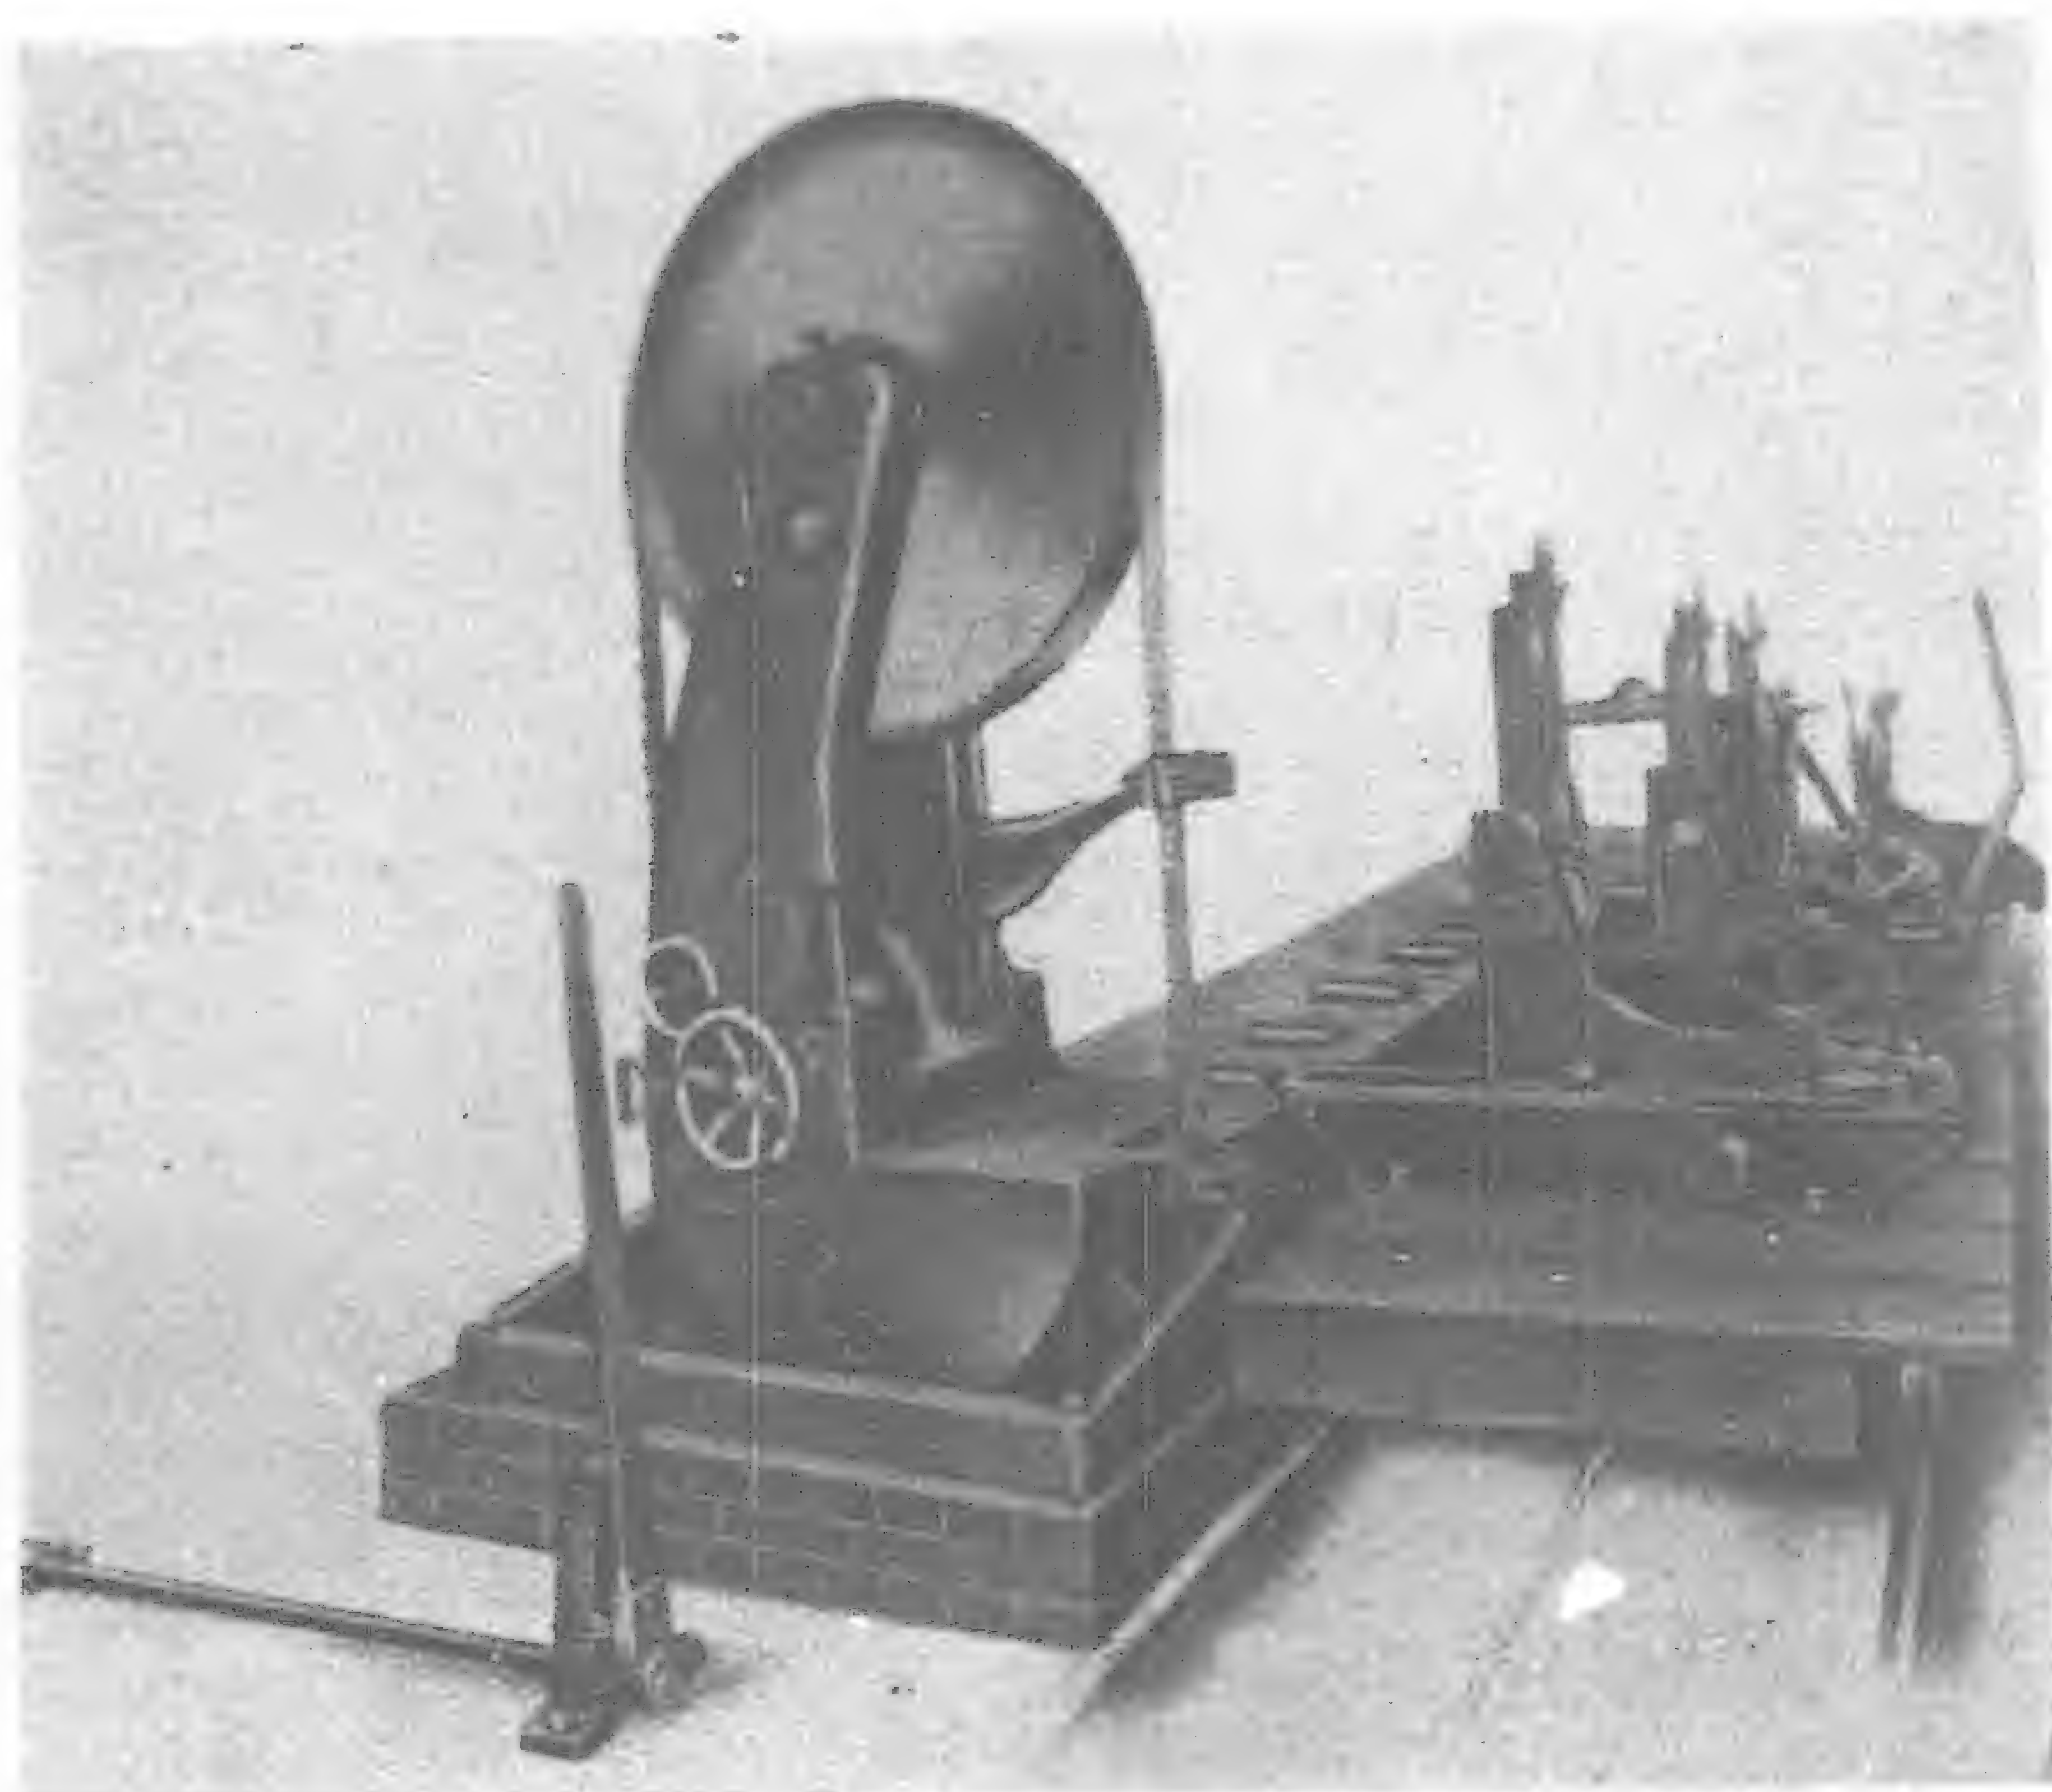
Band Saw. Shaft made of Nickel-Chromium Steel. Manufactured by Kikukawa Engineering Works (Ohminato Miyeken)
